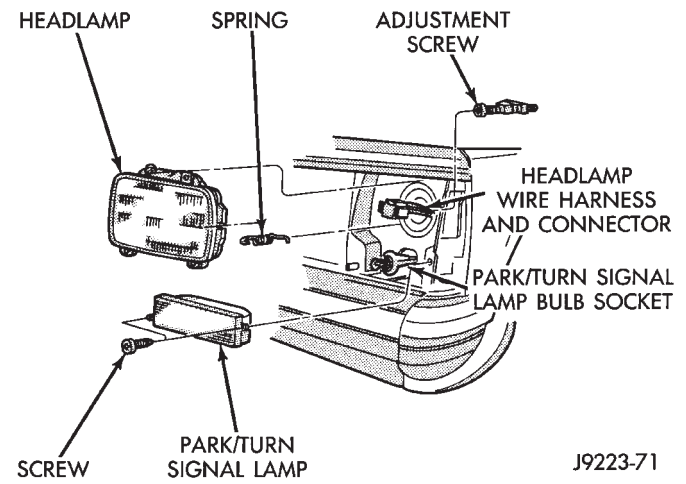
Headlamp & Park/Turn Signal Lamp Removal/Installation
